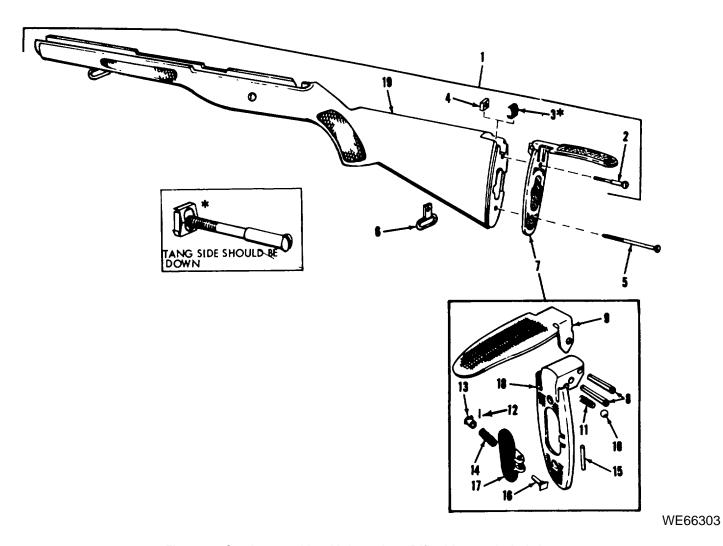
Stock assembly with butt plate, Rifle, M14-exploded view.
